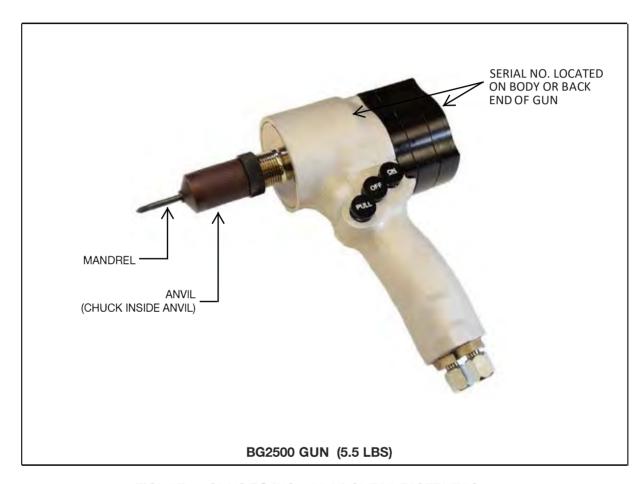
GUNS TO INSTALL HI-SHEAR FASTENERS
